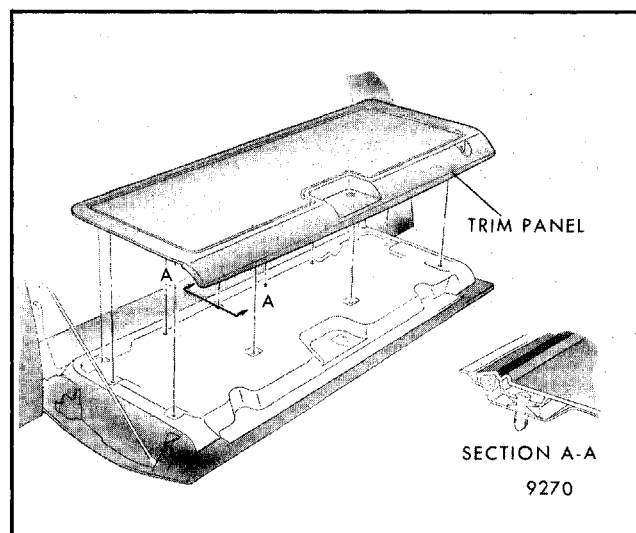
"B-35" Tailgate Inner Trim Panel Removal
